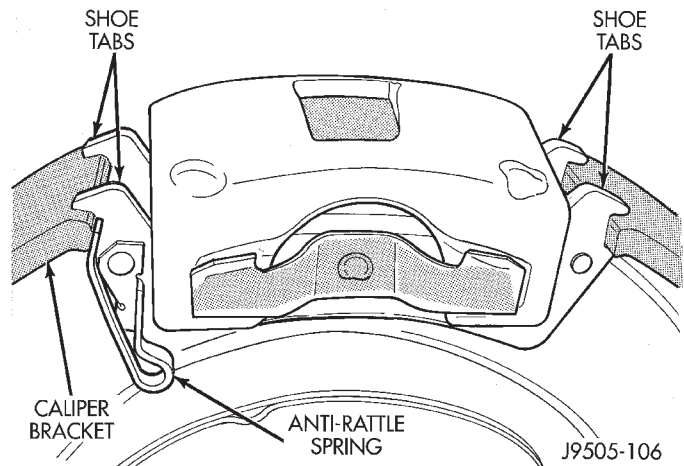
Correct Brakeshoe Position On Bracket (Right Rear Caliper Shown)
